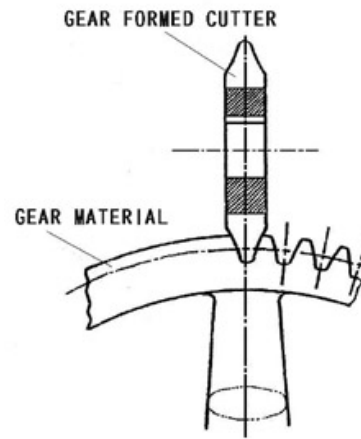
Manufacturing of a gear with a gear formed cutter.
